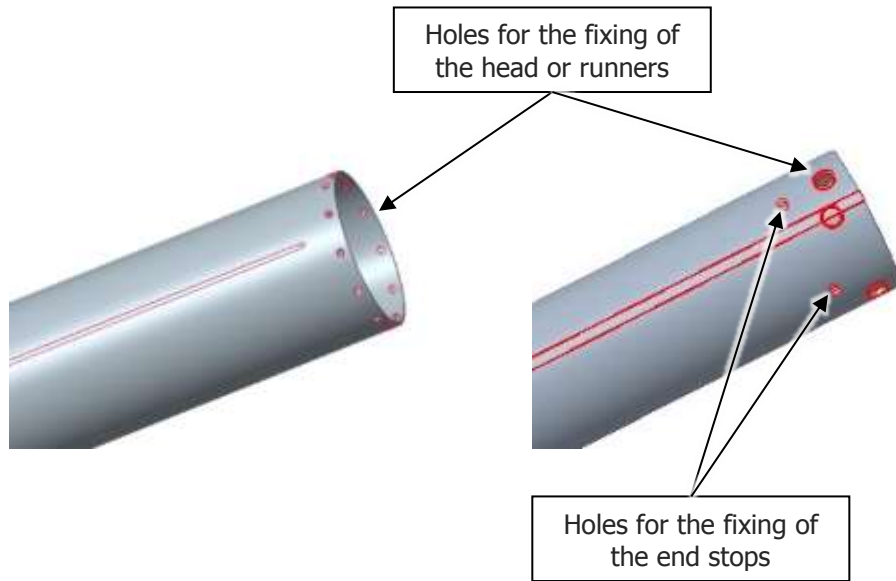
Grooves on the mobile tubes – Upper part of a mobile tube
